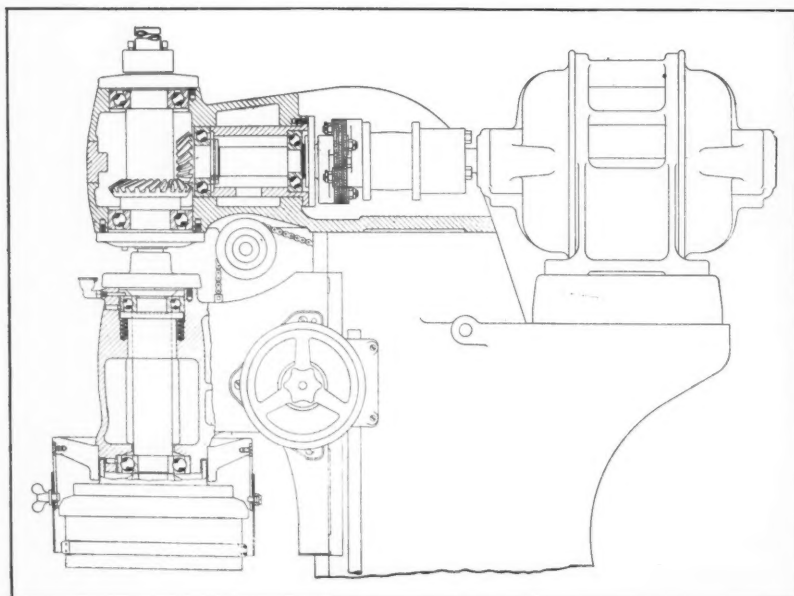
Arrangement of the Motor Drive to the Grinding Wheel Spindle
